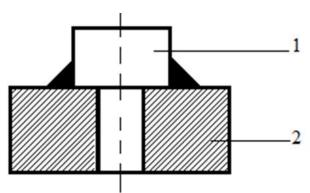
MANUFACTURING PART: 1 - ROD, 2- PLATE
